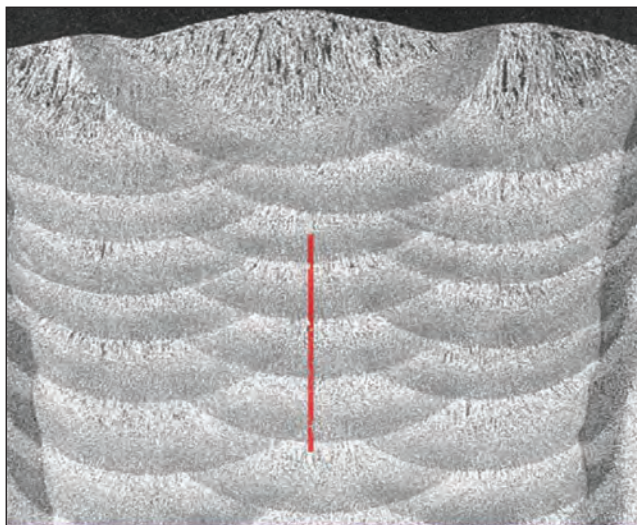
Cross section of a typical test weldment with three beads per layer (Ref. 23).
